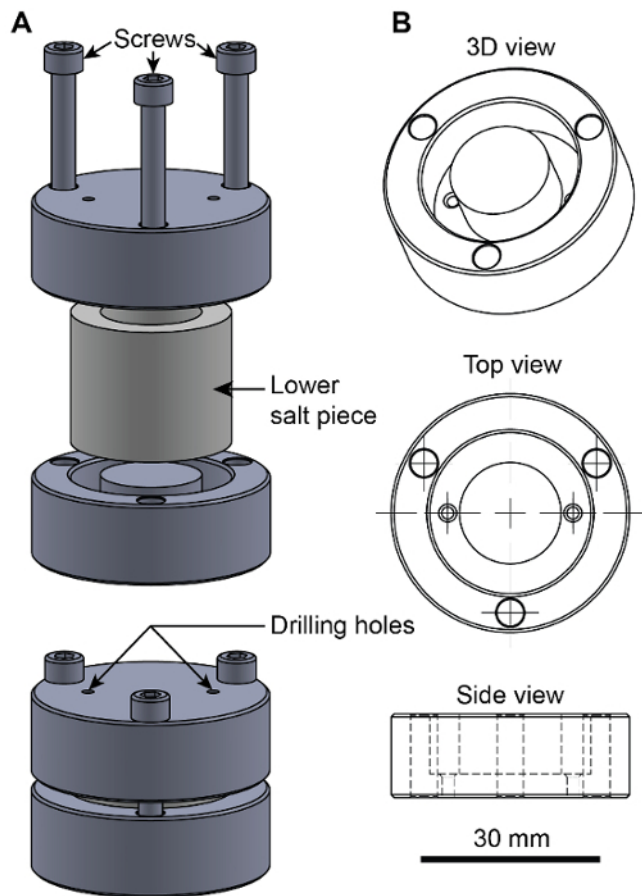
Tool required to drill the lower outer salt piece. A) 3D views before (top) and during (bottom) drilling. B) Scaled drawings (3D, top and side views) of the tool (only one part is shown). [Please click here to view a larger version of this figure.](#)
